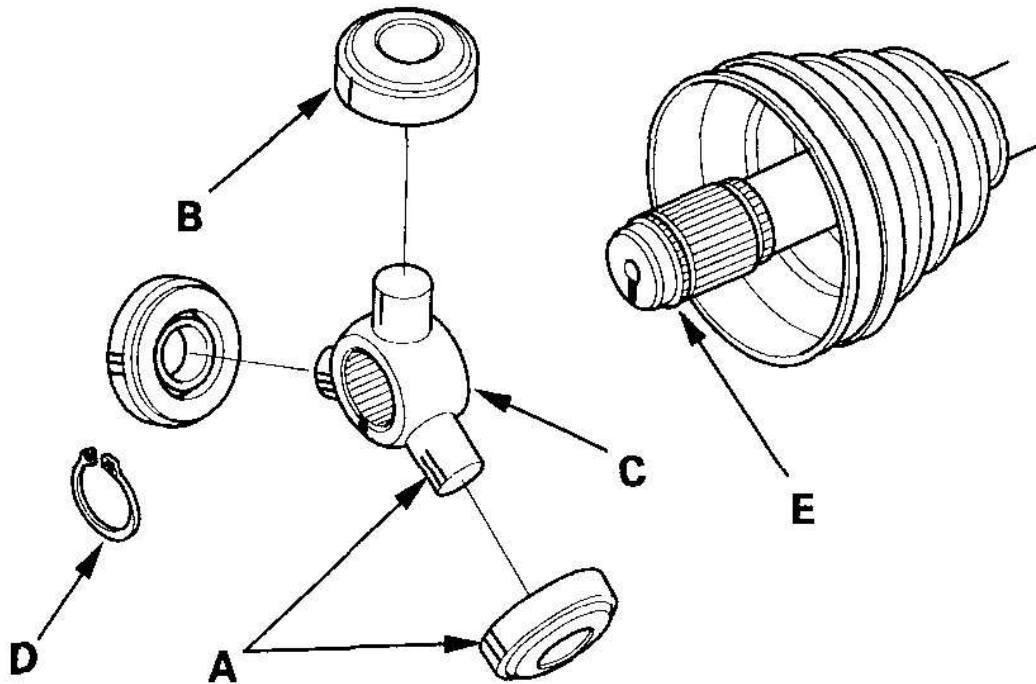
Identifying Mark On Each Roller And Inboard Joint
